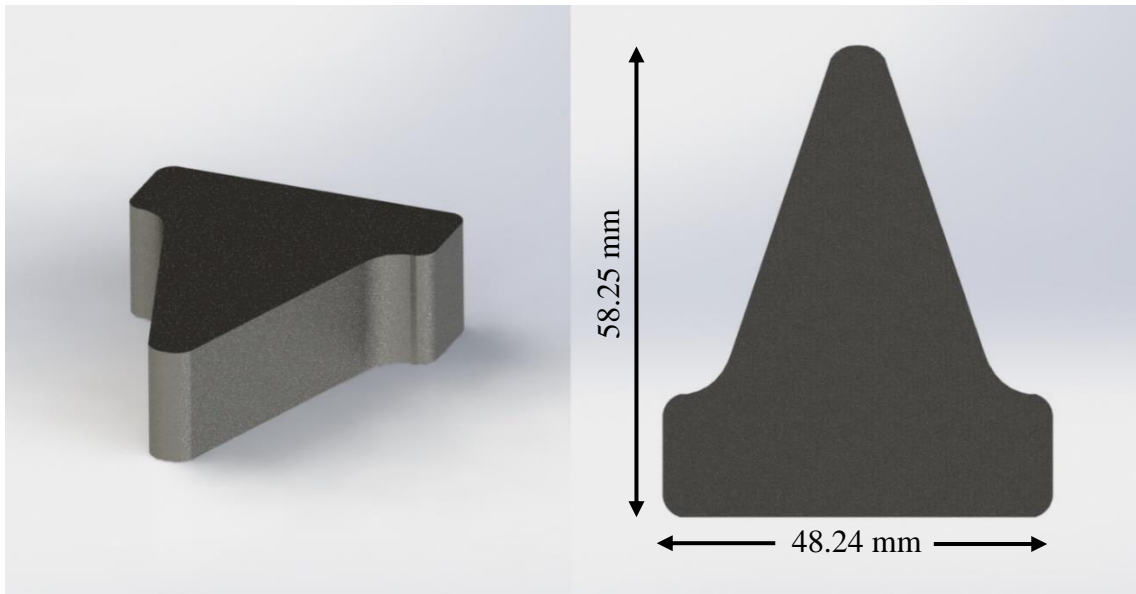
SolidWorks rendering of half-feed combine harvester small bottom blade blanking punch
